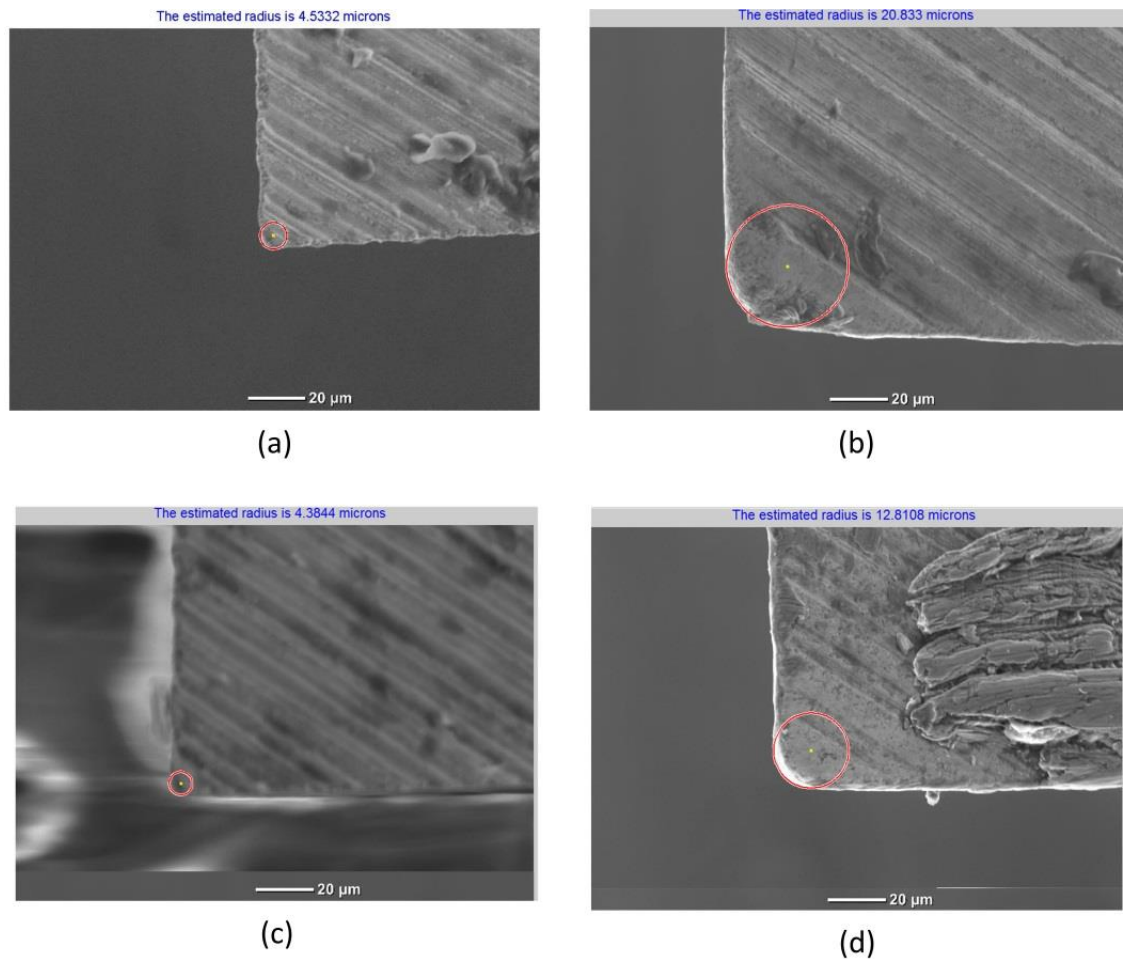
Cutting edge radius of tungsten carbide tools before and after machining:
